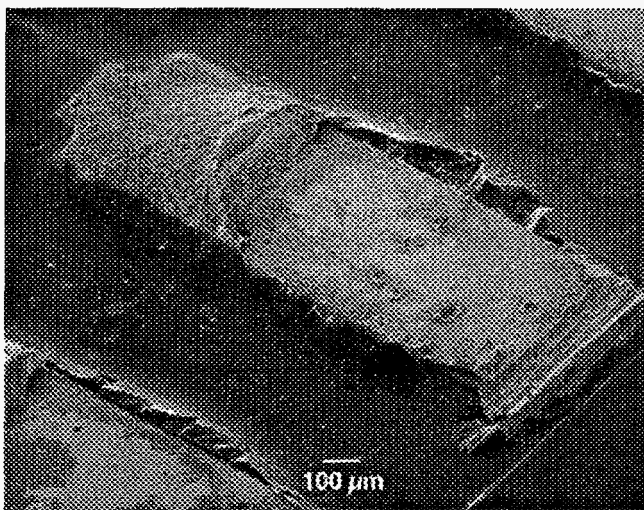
Scanning electron micrograph of the solder joint pull test failure morphology (circuit board pad) on as-fabricated test vehicles with CASTIN™ solder, Sn-Pb (HASL) PCB finish, and Sn-Pb lead finish .
